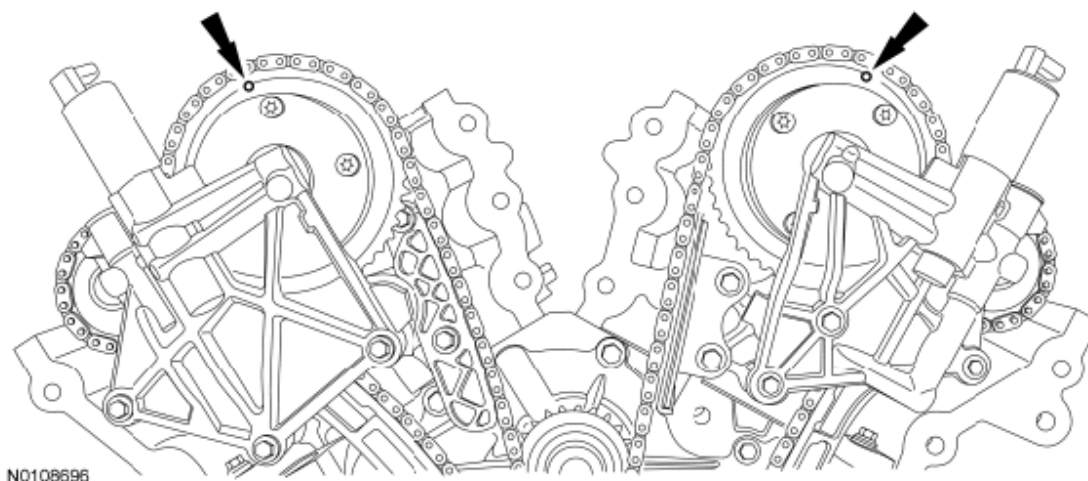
Locating Timing Marks On Variable Camshaft Timing (VCT) Assemblies
